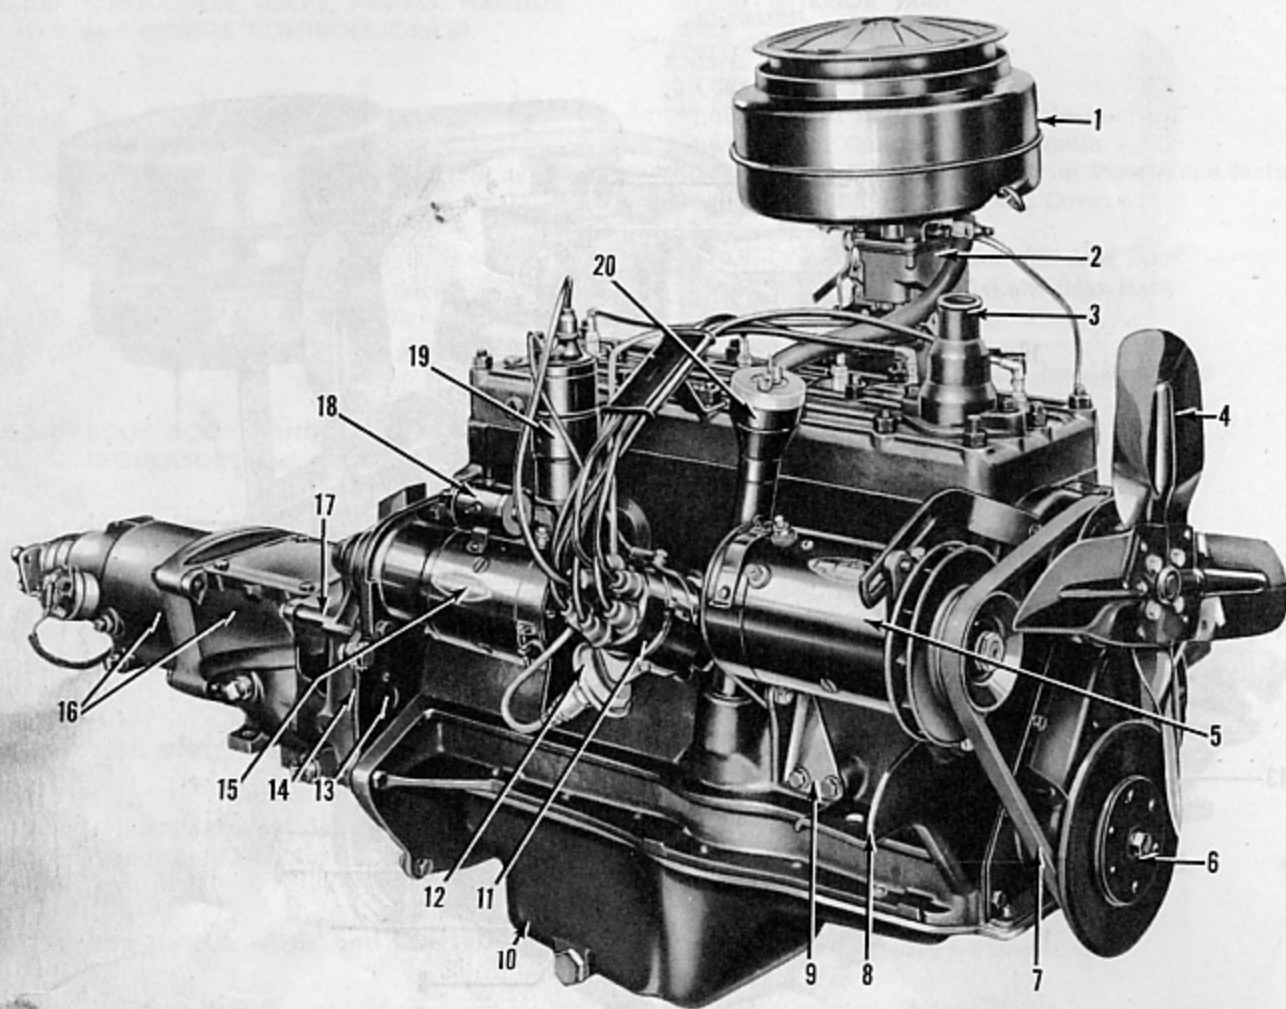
EXTERIOR VIEW OF ENGINE—RIGHT SIDE—6 CYLINDER
